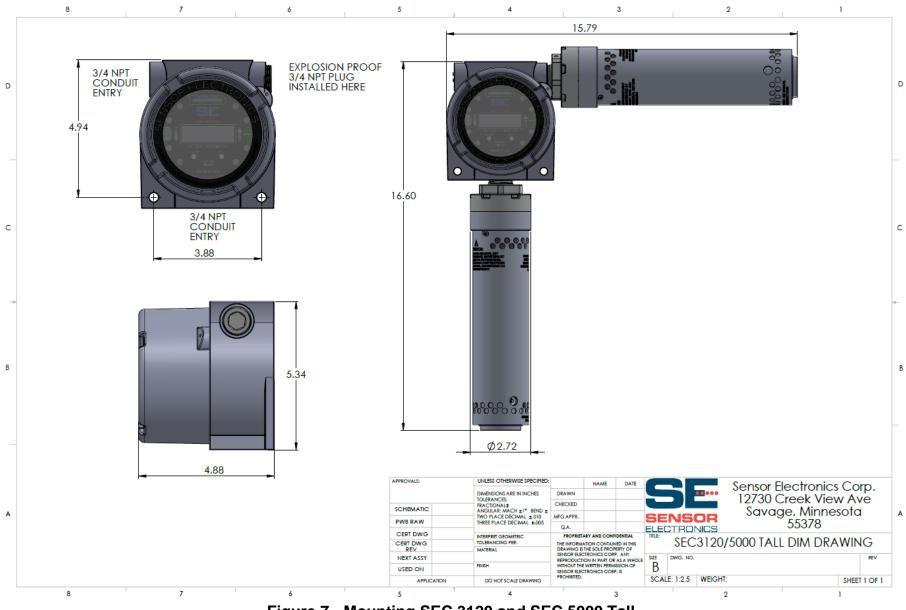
Mounting SEC 3120 and SEC 5000 Tall
